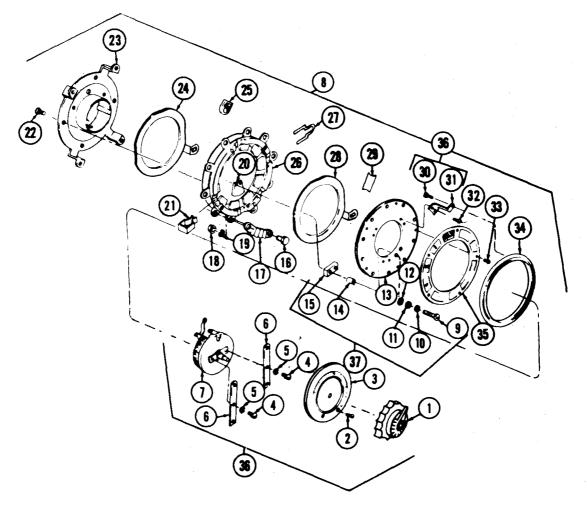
Rotary Switch (10-Range), Exploded View.
